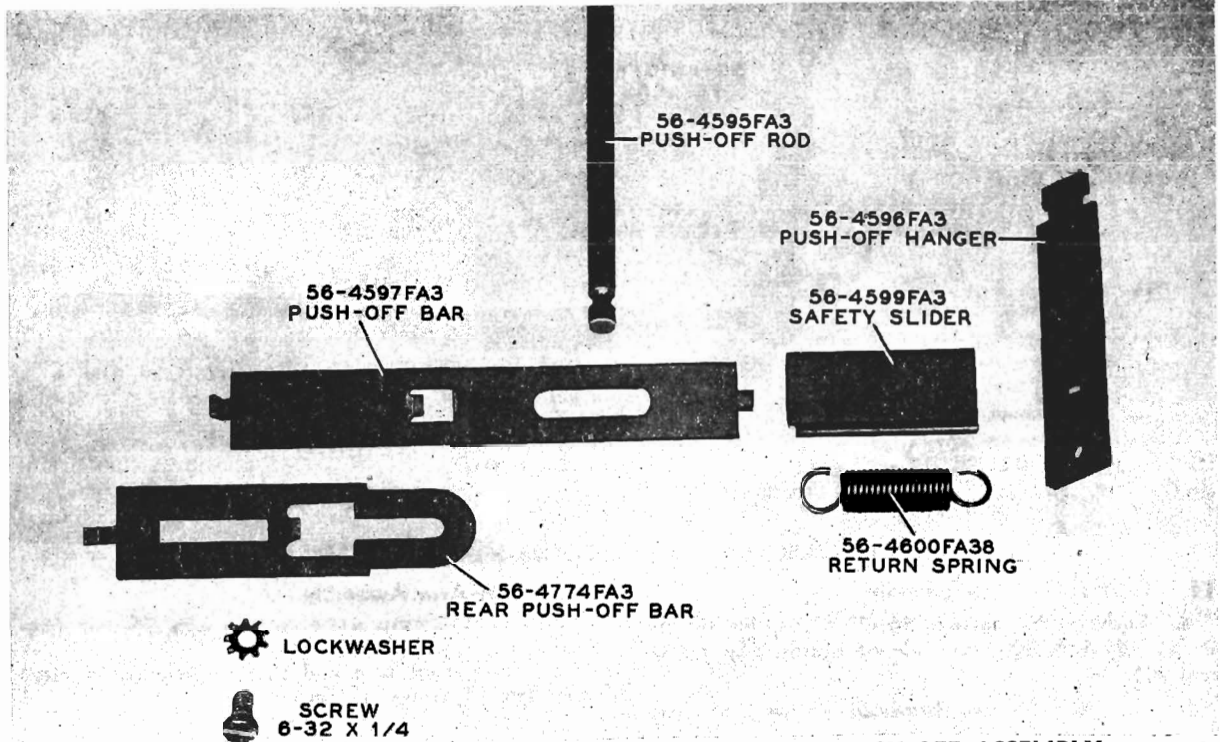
PUSH-OFF ASSEMBLY TP-4183
